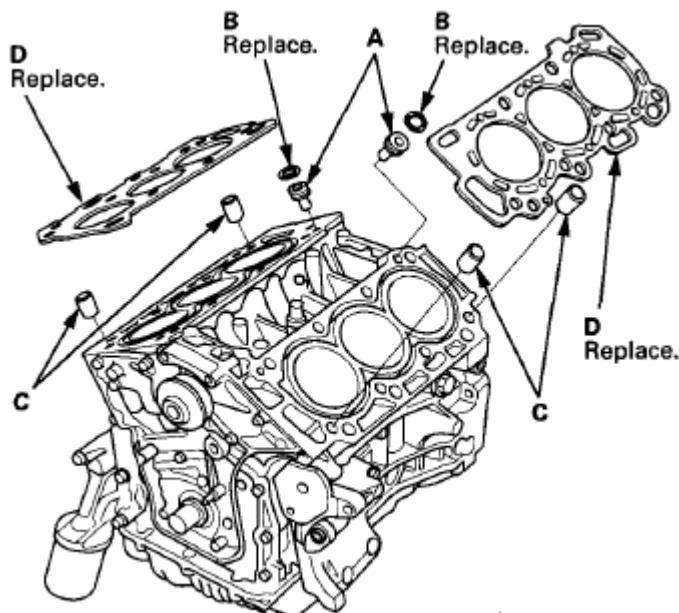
Identifying Oil Control Orifices, O-Rings, Dowel Pins And Head Gasket
